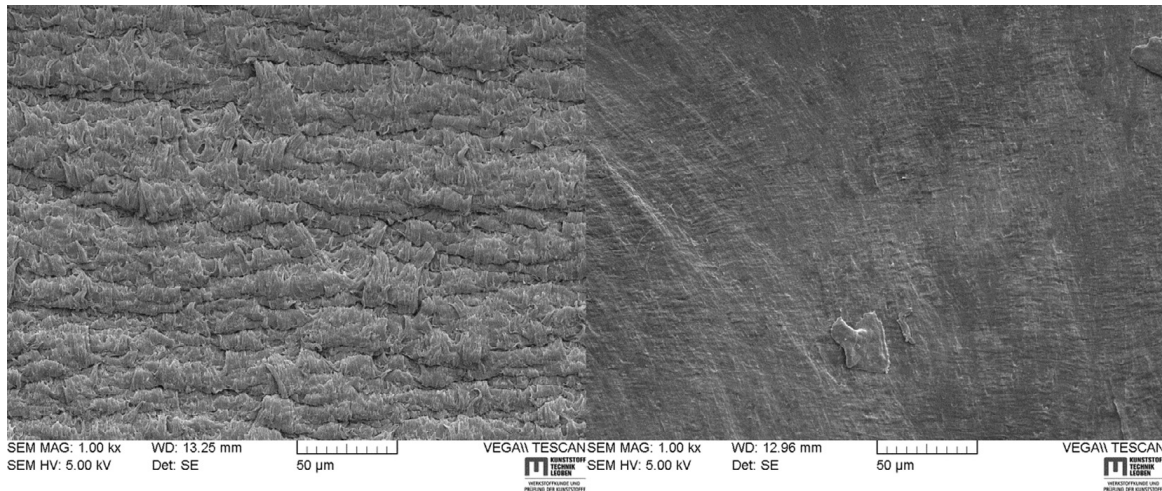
Fracture surfaces of PP-B (left picture) and PP-R (right picture) after significant crack propagation.
